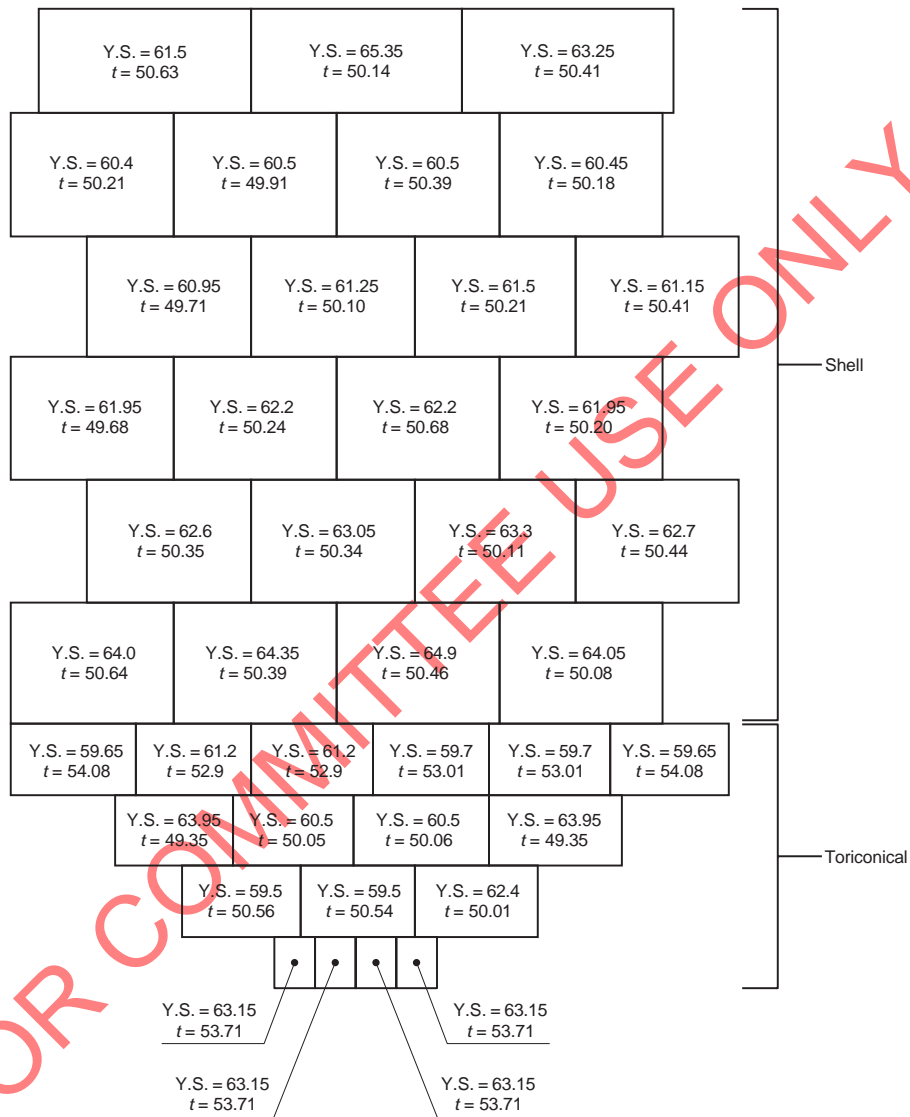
A Typical Sectional Plate Layout Used to Minimize Plate Strength and Thickness Mismatch
